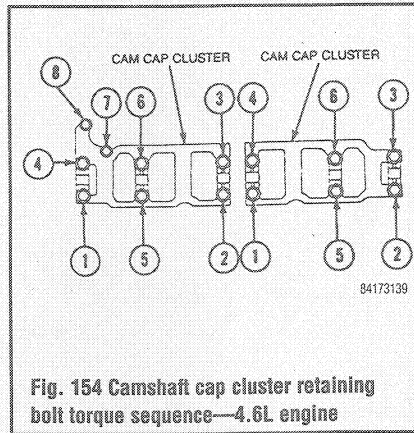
Camshaft cap cluster retaining bolt torque sequence—4.6L engine
